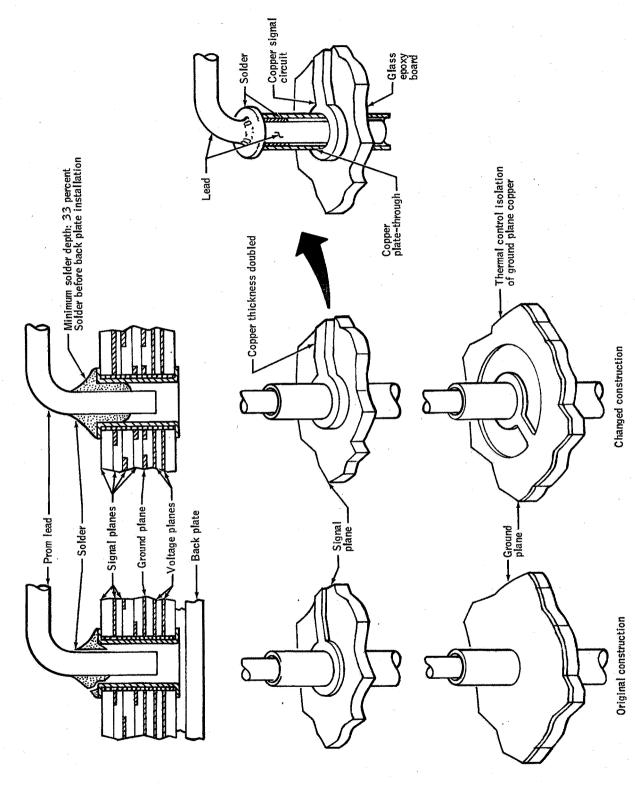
Change in computer page lead connections to improve solder wicking.
